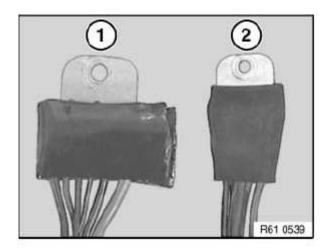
Identifying Sealing Compound Courtesy of BMW OF NORTH AMERICA, INC.
